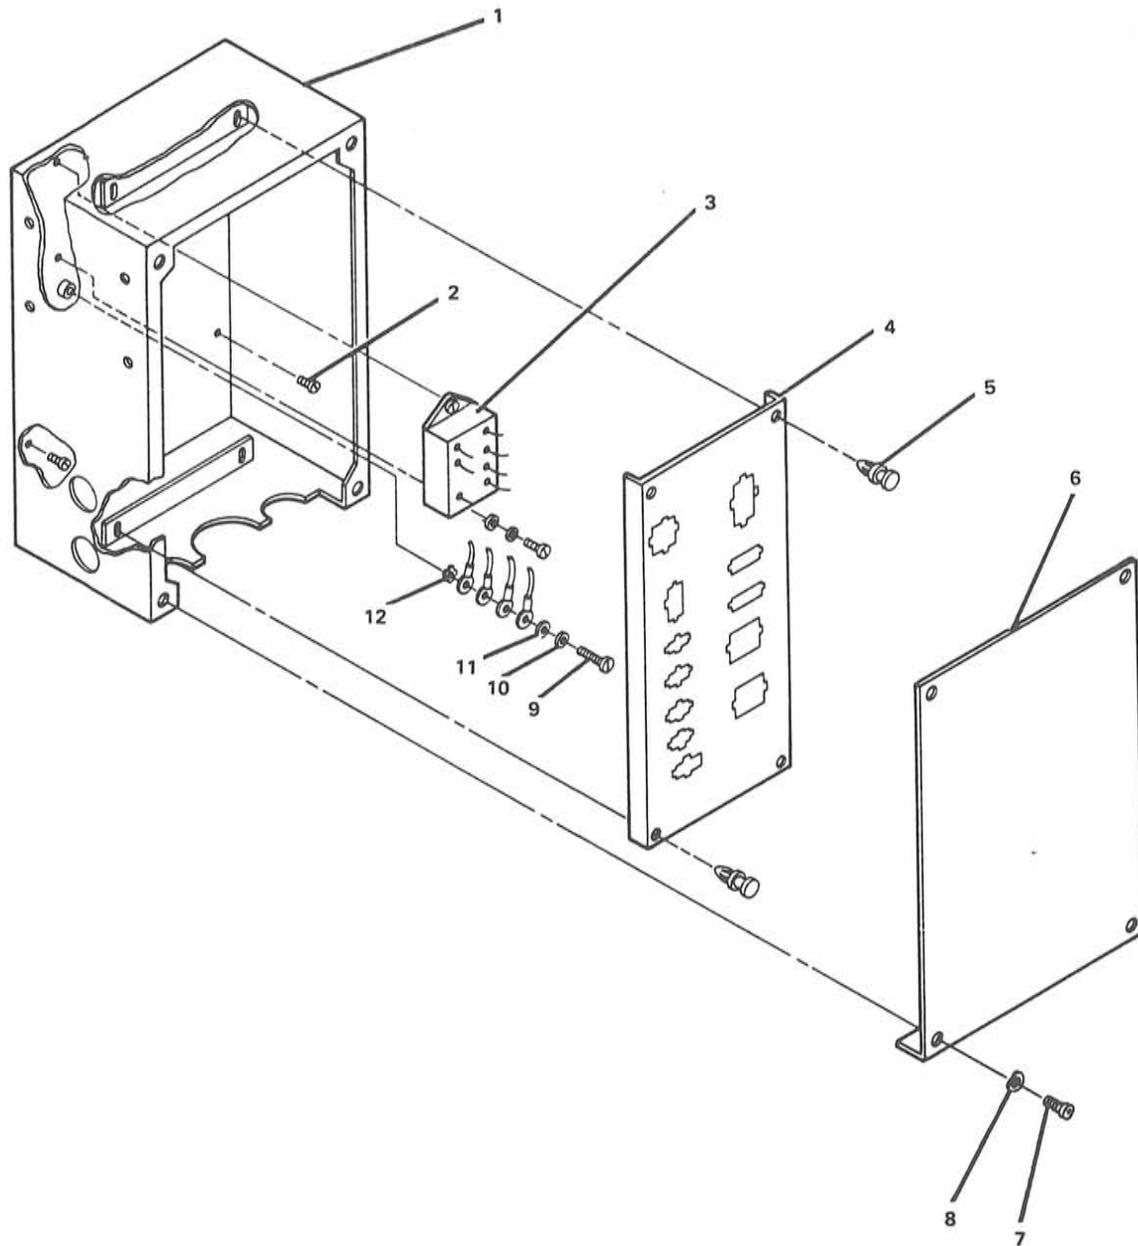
OUTLET BOX ASSEMBLY. SEE LIST 7.
